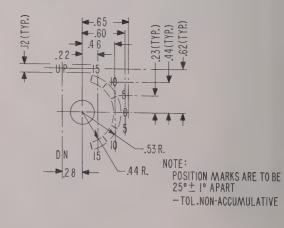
Type CON-1J Control, Dimensional Outline Drawing
